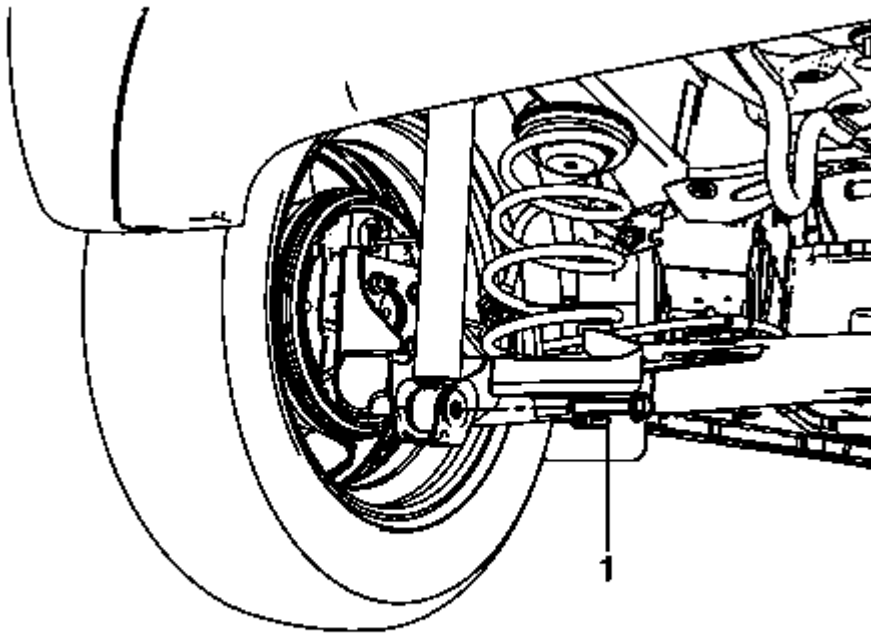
Shock Absorber Strut To Rear Axle Retaining Bolt
